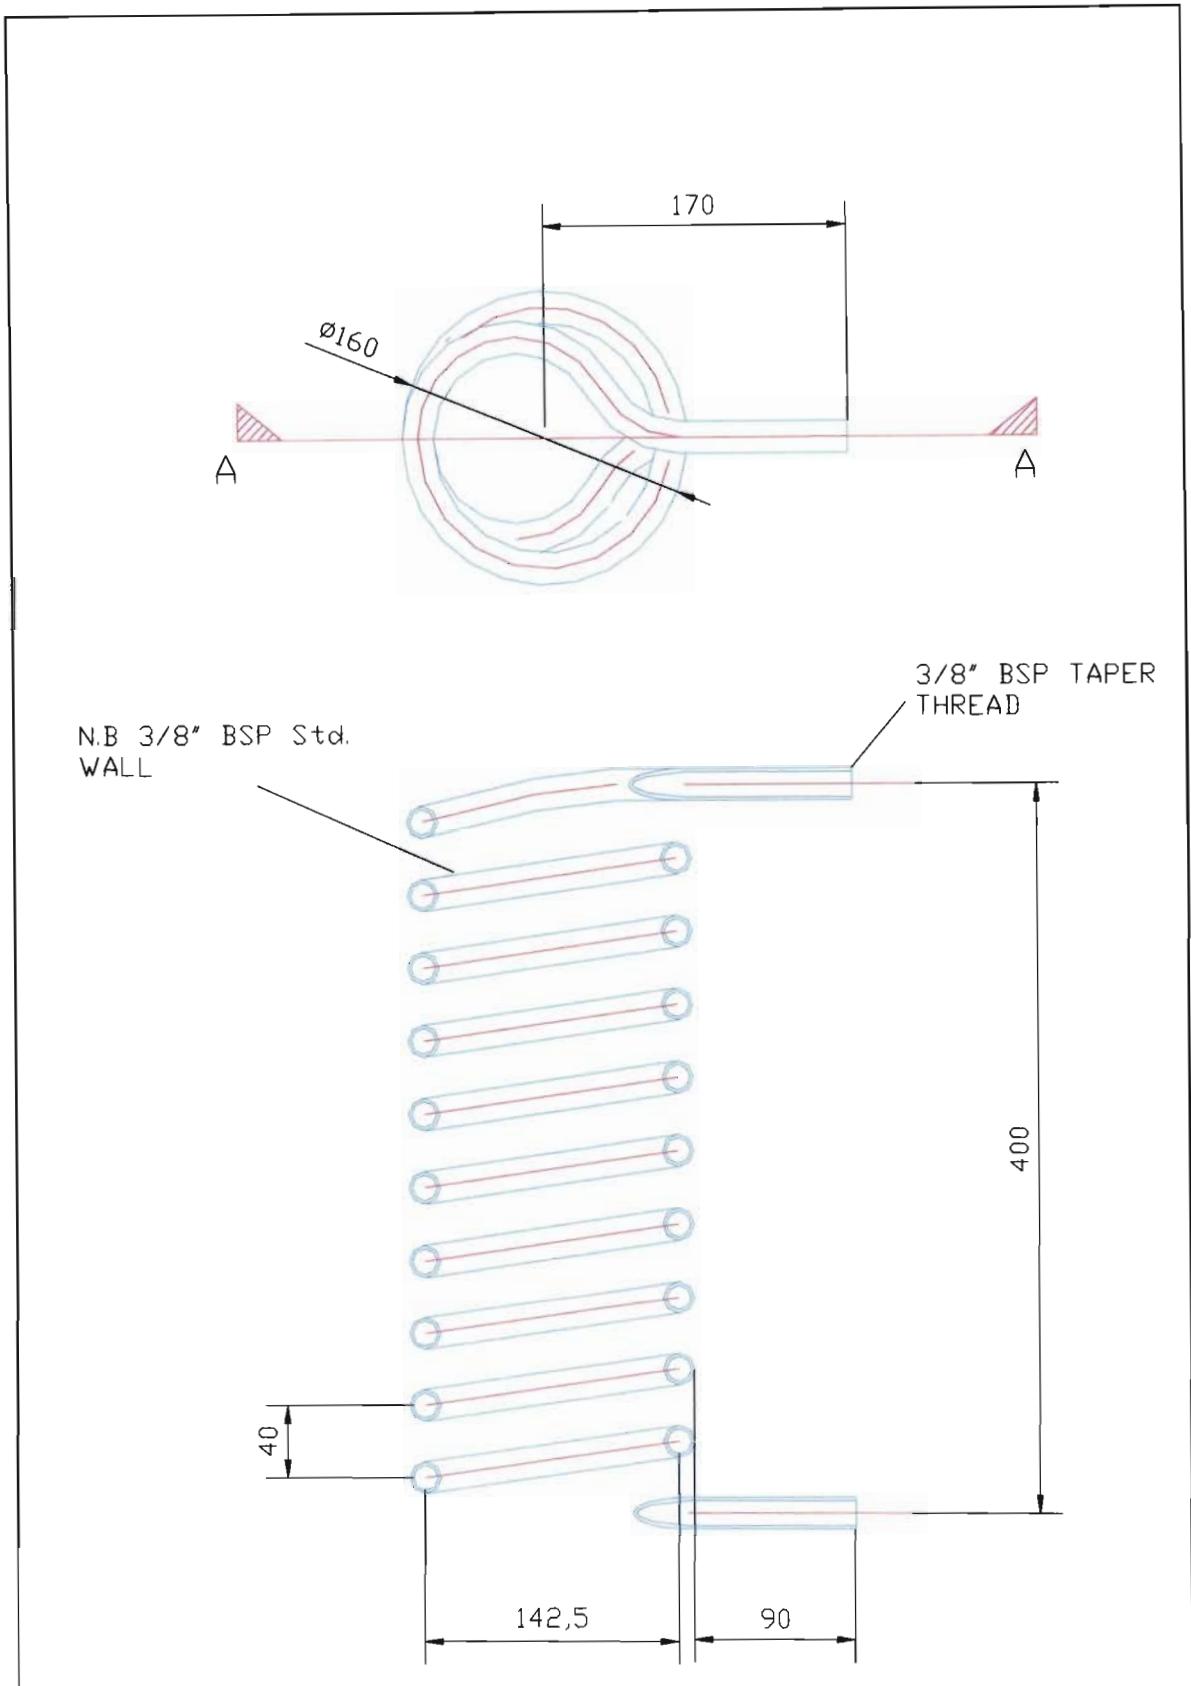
Drawing Design of the Heat Transfer Coil Pipe
